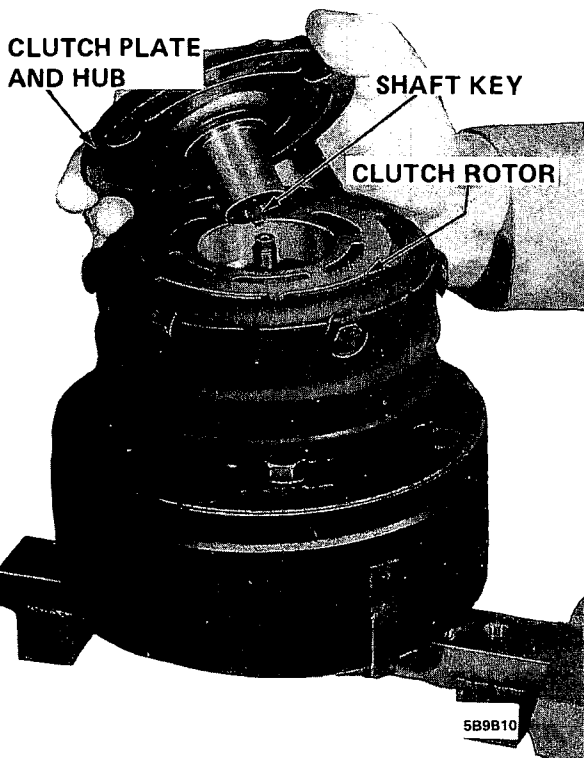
B-33 - Installing Shaft Key - 4 Cylinder Compressor
